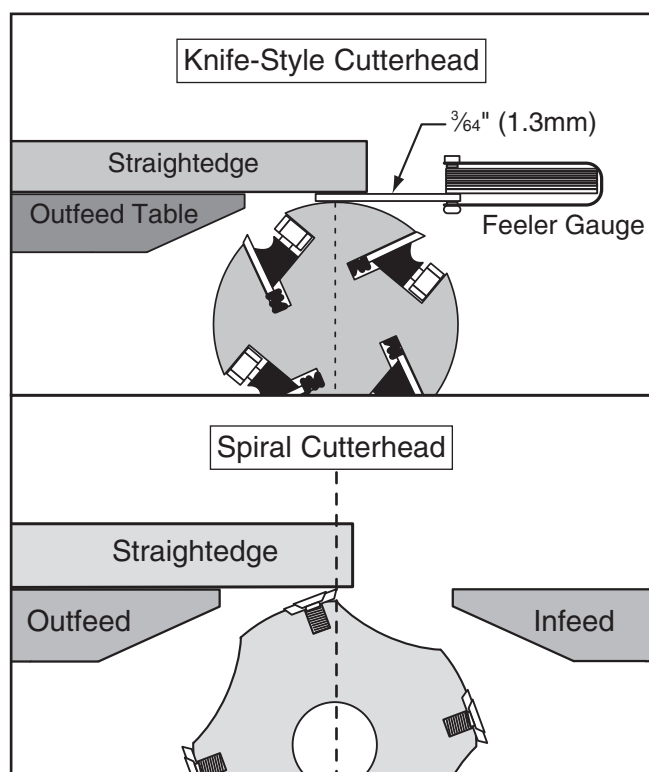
Checking the outfeed table for the correct height above the cutterhead.
